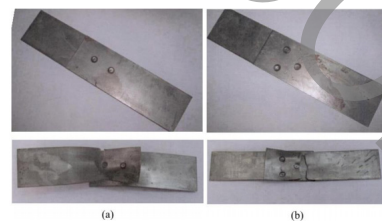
Experimental tests, (a) two spot welds (b) three spot welds
